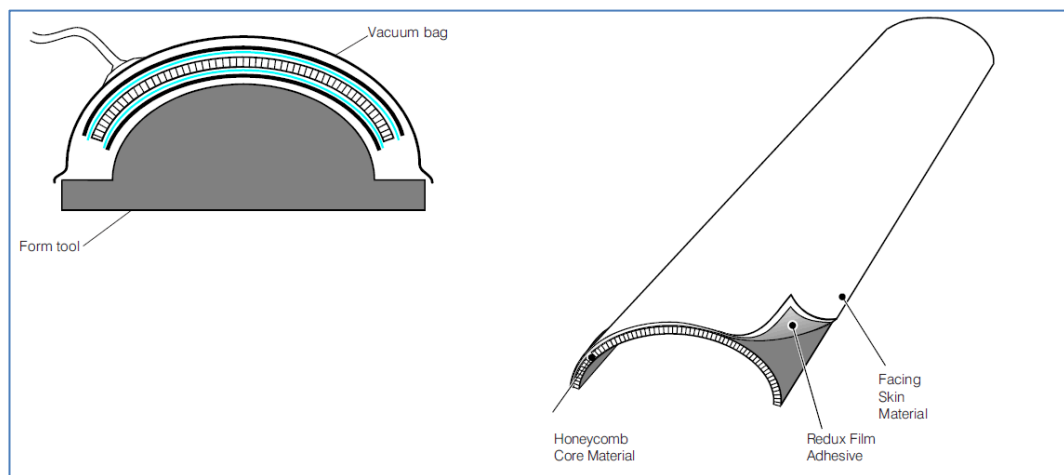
Vacuum Bag Processing assembly for honeycombs panel (Hexweb 2000).
